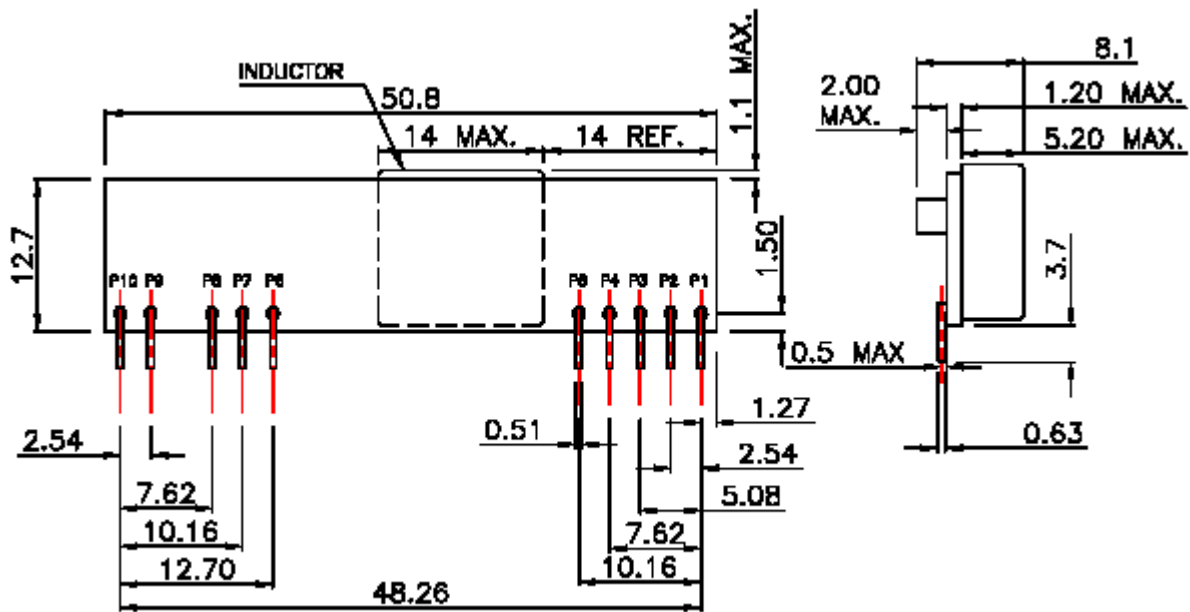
APA18 Mechanical Outline/ Drawing for Vertical type
